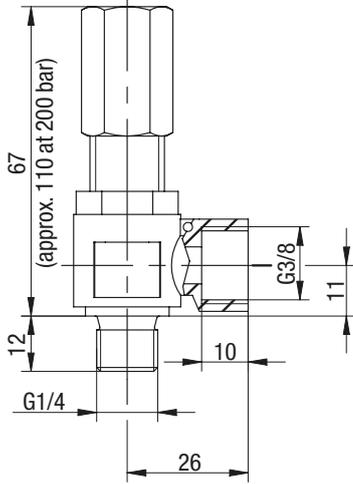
Dimensioned drawing pressure-relief valve DN6 (spring-loaded seat valve)
